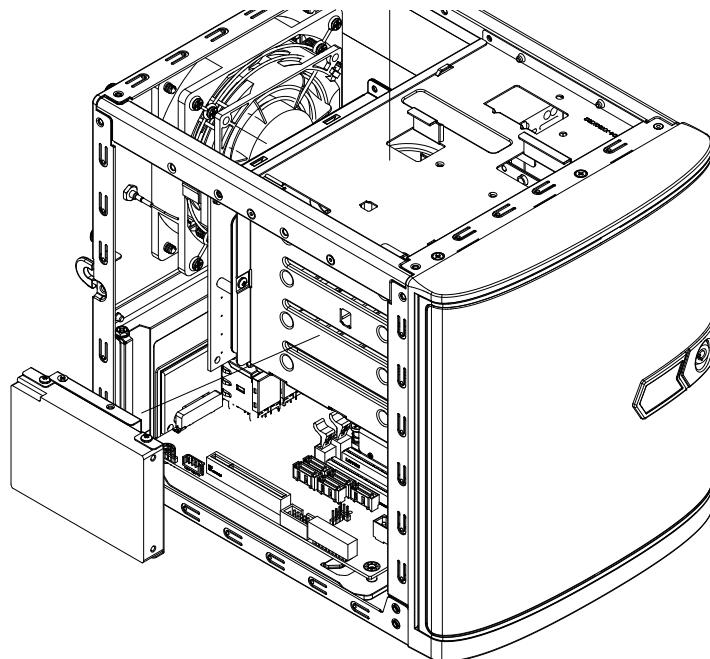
Installing the Side Mounted Fixed Hard Drive
